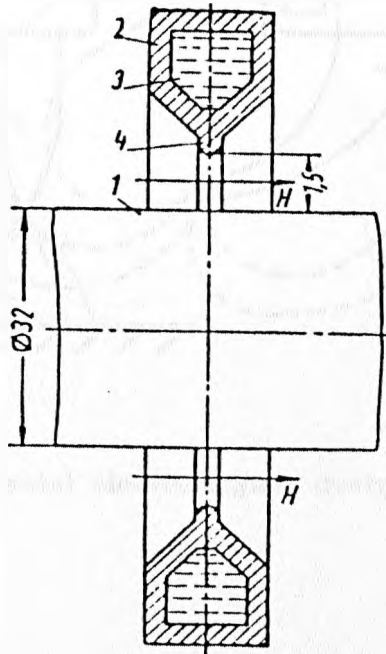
Magnetic rotation of a welding arc between concentric electrodes. 1, inner electrode; 2, outer electrode; 3, water cooling duct; 4, internal flange
